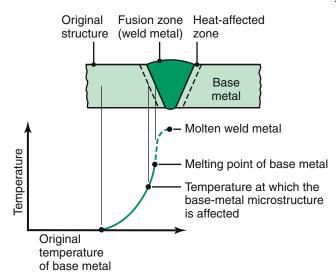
Characteristics of a typical fusion-weld zone in oxyfuel–gas and arc welding.
